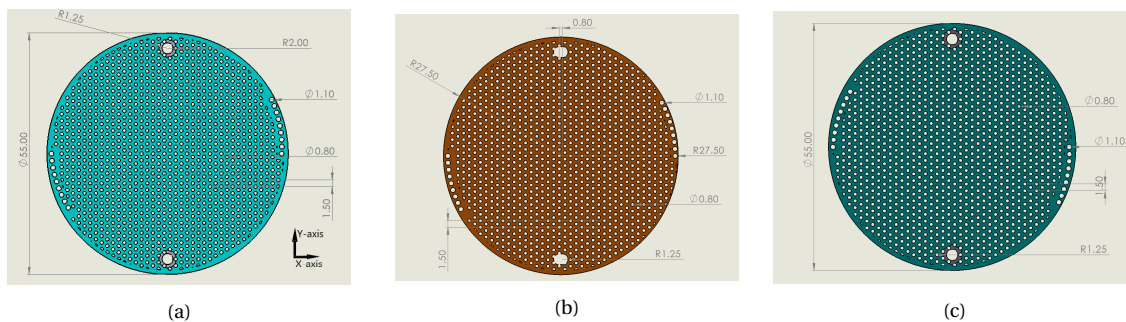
3-D printed Perforated disks for $l_h = 1.5$ mm hole spacing; (a): Top disk; (b) Middle disk; and (c) Bottom disk (all dimensions are in mm)
